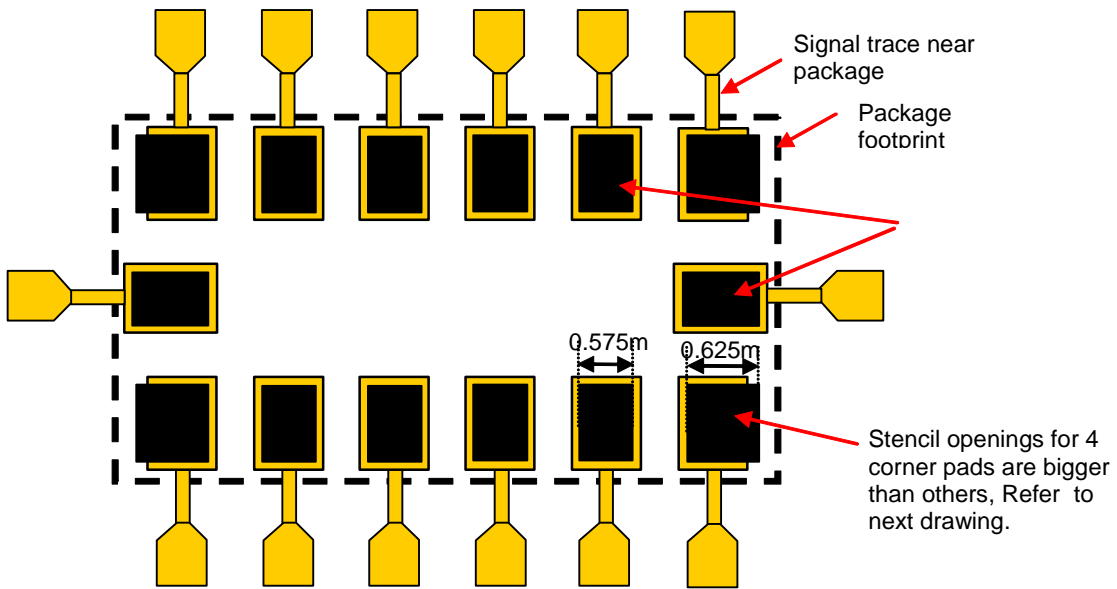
Correct PCB Top Metal Pattern Under Package
